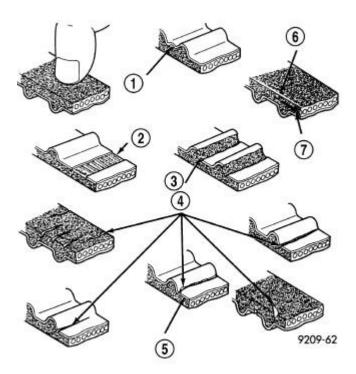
Timing Belt Inspection Courtesy of CHRYSLER LLC
